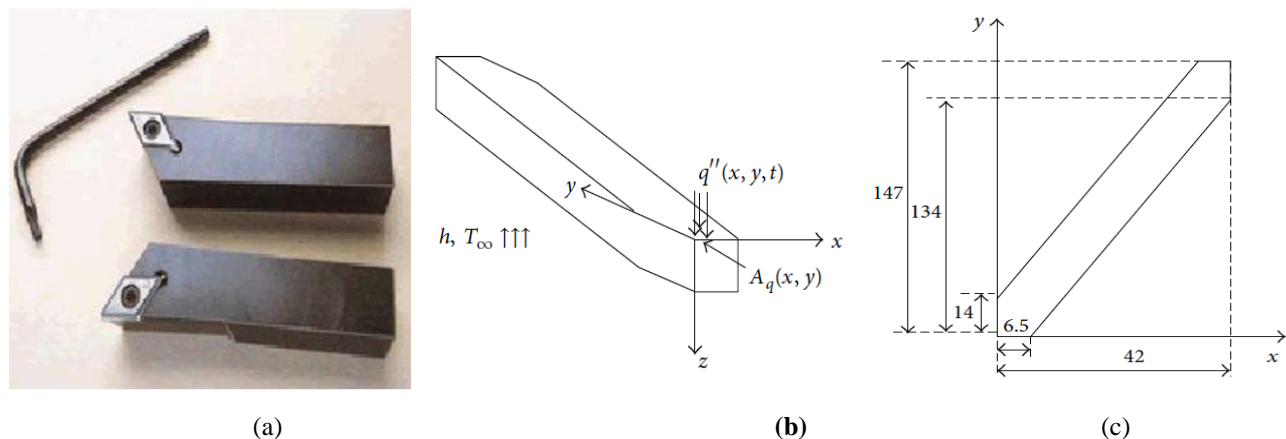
(a) Coated Carbide tool, (b) three-dimensional physical model, and (c) tool dimensions in millimeters (mm) where the coordinate "z" is 9.5 (mm).
